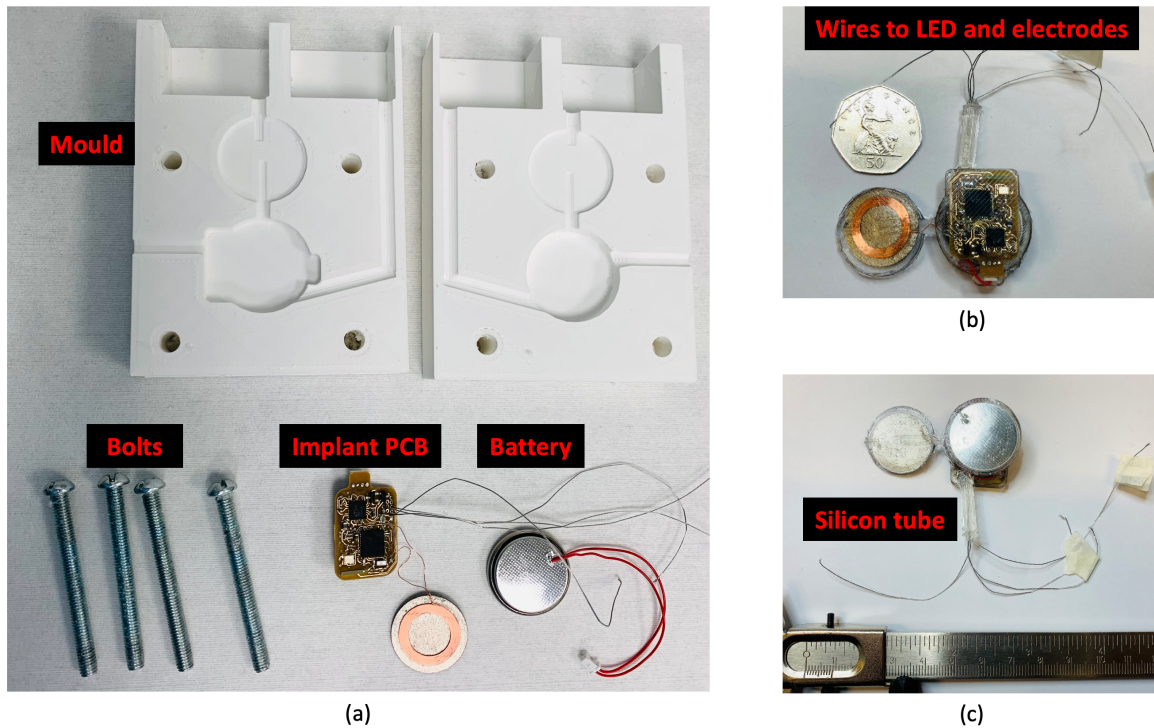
Details of the implant packaging. (a) Cleaned mould, implant PCB, battery and the bolts for encapsulation. (b) Front side of the encapsulated implant with the wires to the LED and electrodes. (c) Back side of the encapsulated implant and the silicon tube.
